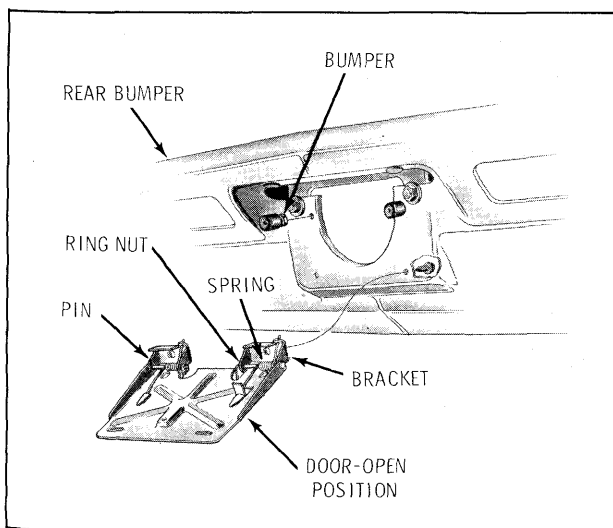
Fuel Filler Door - 33 through 86 Series
